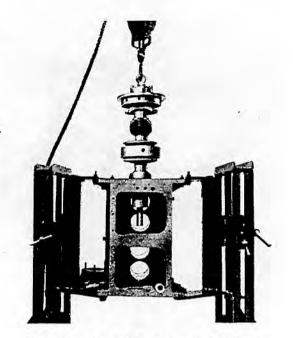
LIFTING CRANKSHAFT ASSEMBLY FROM CYLINDER BLOCK
